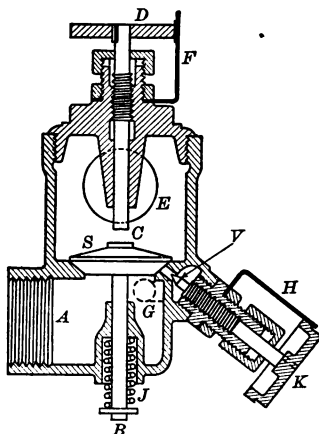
LUNKENHEIMER GASOLINE MIXER, OR "GENERATOR VALVE"
